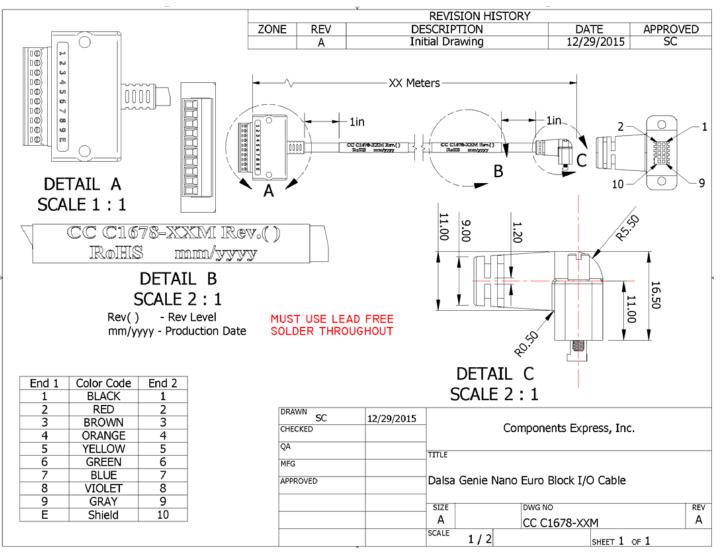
Cable Assembly: Right-Angle I/O to Euro Block
